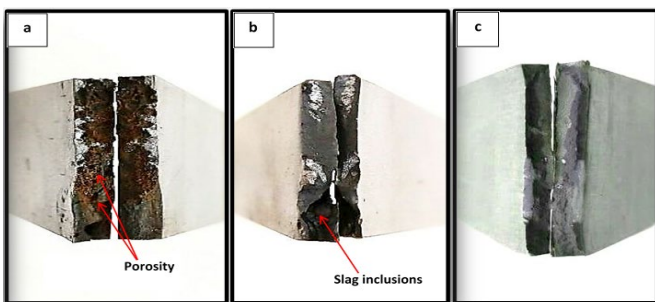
Fractography of the tensile test specimen of (a): oxy-acetylene weld, (b and c): SMA weld
